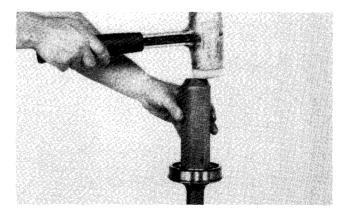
Position new oil sealing ring on turbine shaft. Install turbine shaft bearing on shaft with bearing outer locating ring down.
